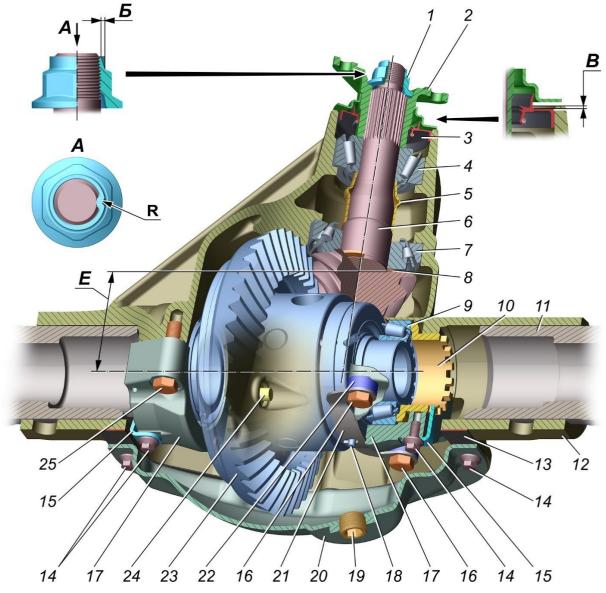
Reduction gear of rear axle with locking differential: B=0.8 mm, min.; C=0.9-1.5 mm; R = 1.2 mm, min.; 1 - nut; 2 - drive gear flange; 3 - collar seal; 4, 7, 9 - bearings; 5 - spacer bushing; 6 - drive gear; 8 - adjustment ring; 10 - differential bearing nut; 11 - axle housing; 12 - rear axle housing; 13 - gasket; 14, 16, 25 - bolts; 15 - retainer plate; 17 - differential bearing cover; 18 - electromagnet cage pin; 19 - oil filler plug; 20 - housing cover; 21 - retainer plate; 22 - washer; 23 - locking differential with driven gear; 24 - magnetic plug.
